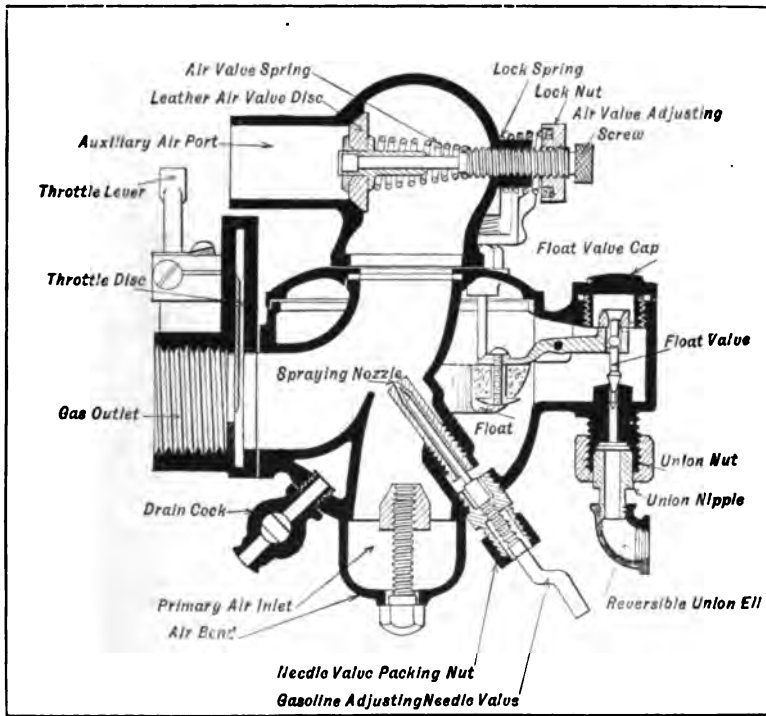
Schebler carburetor construction outlined. This is one of the simplest forms that have been used extensively.
